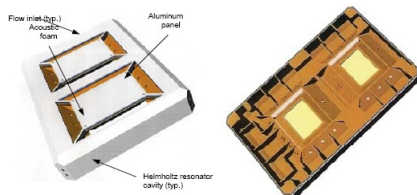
Muffler computer aided design drawings showing views of top and bottom
